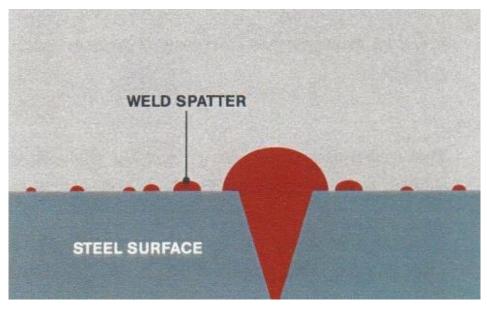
Surface imperfections due to weld spatter
